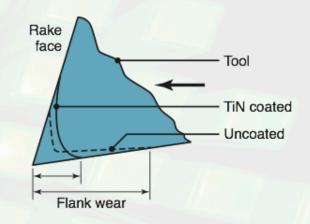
Wear patterns on high-speed-steel uncoated and titanium-nitride-coated cutting tools. Note that flank wear is lower for the coated tool.
